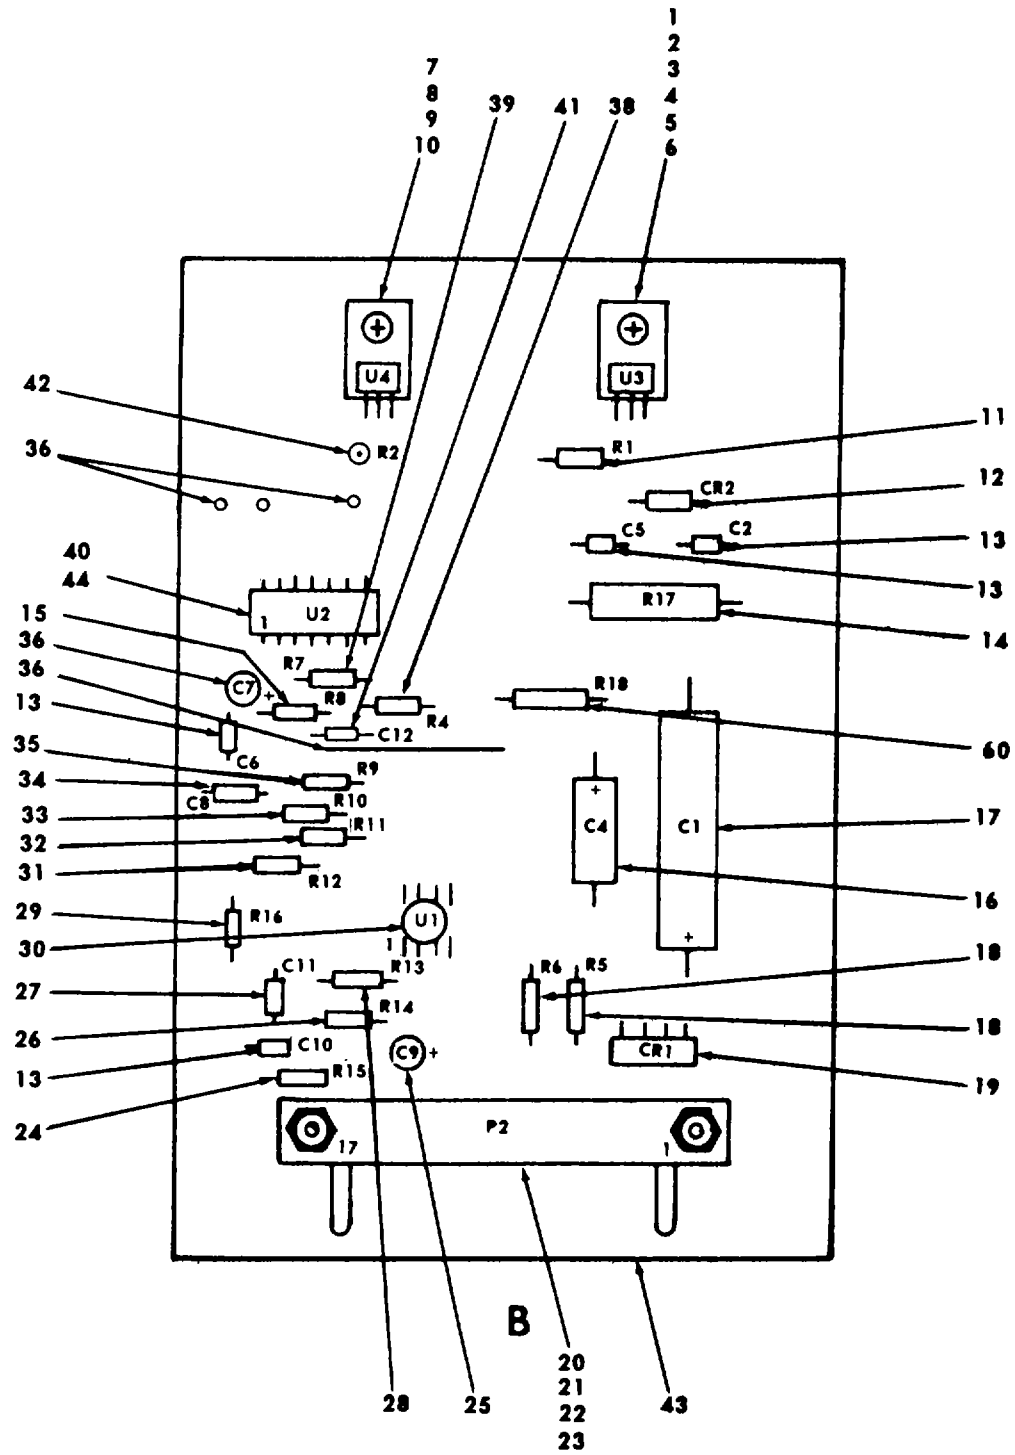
Circuit Board Assembly (Sheet 2 of 2)
